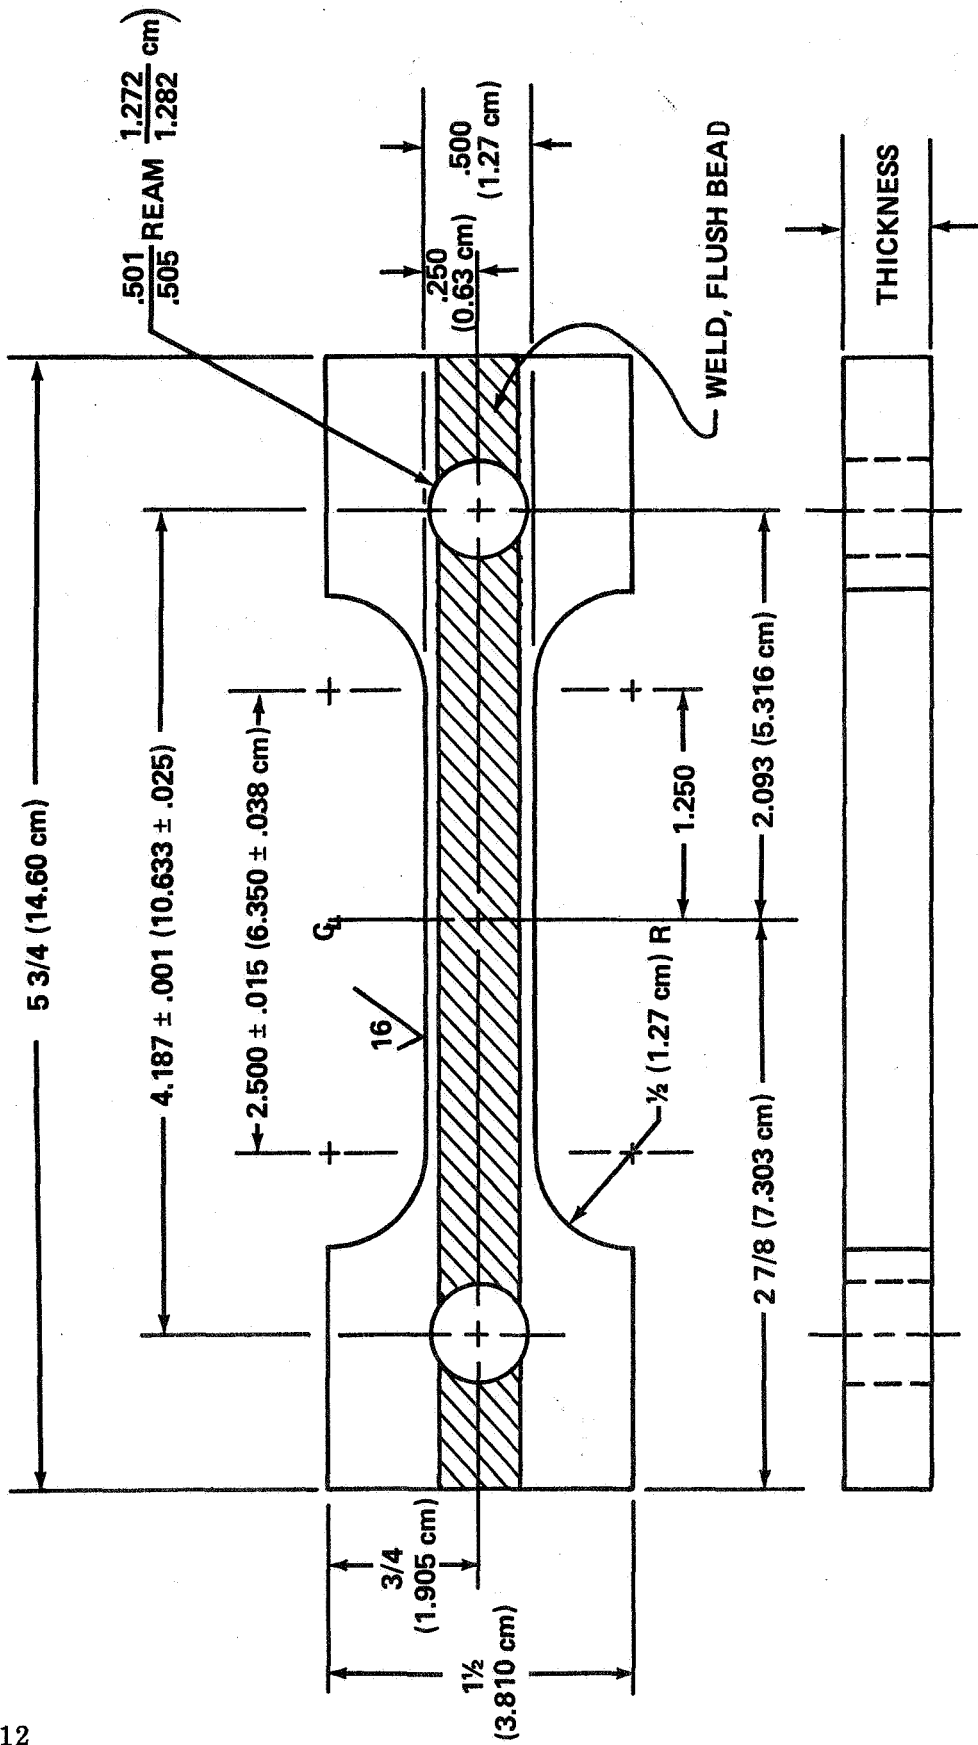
Longitudinal weld tensile specimen configuration.
